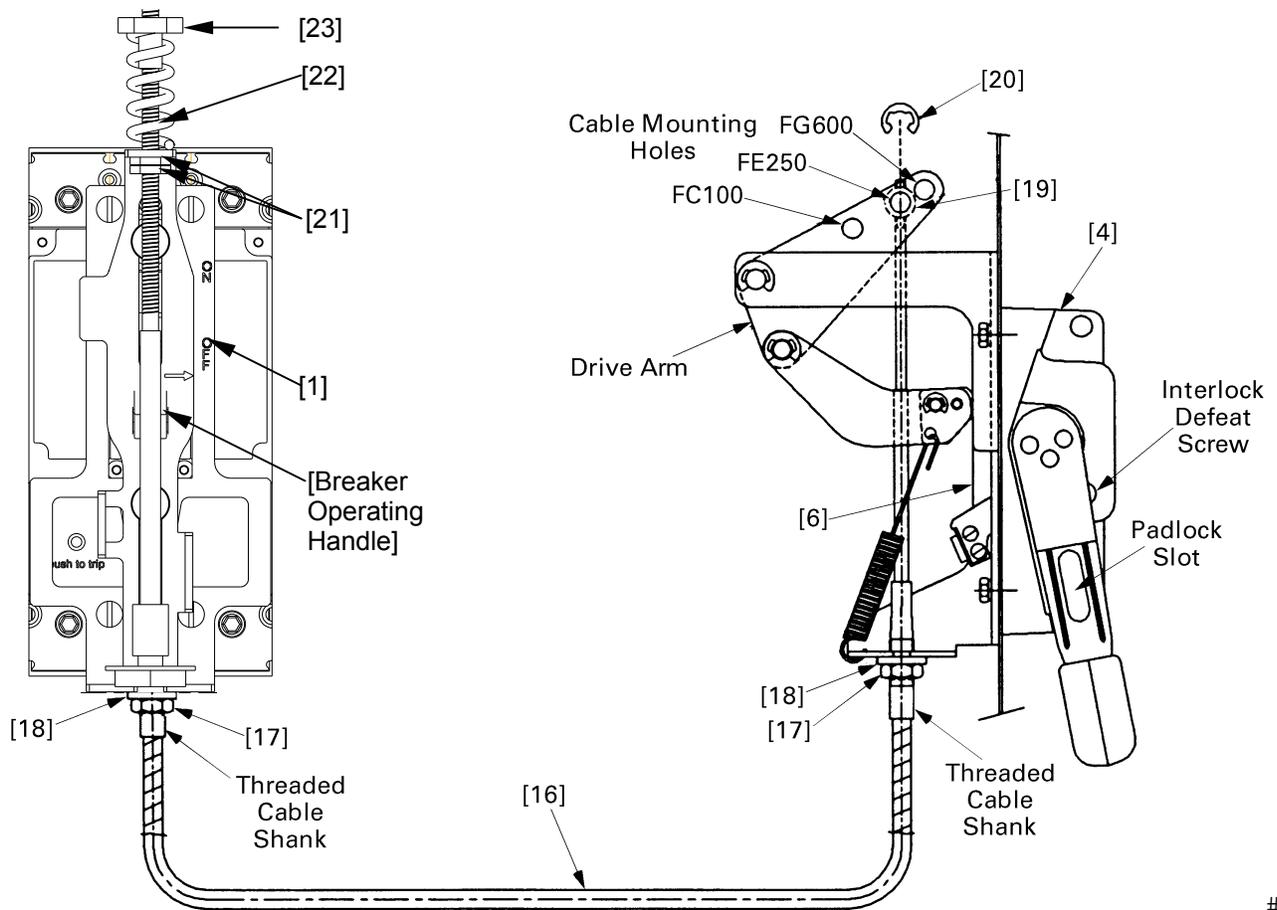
Installing the operating cable between the handle assembly and the breaker operating mechanism
